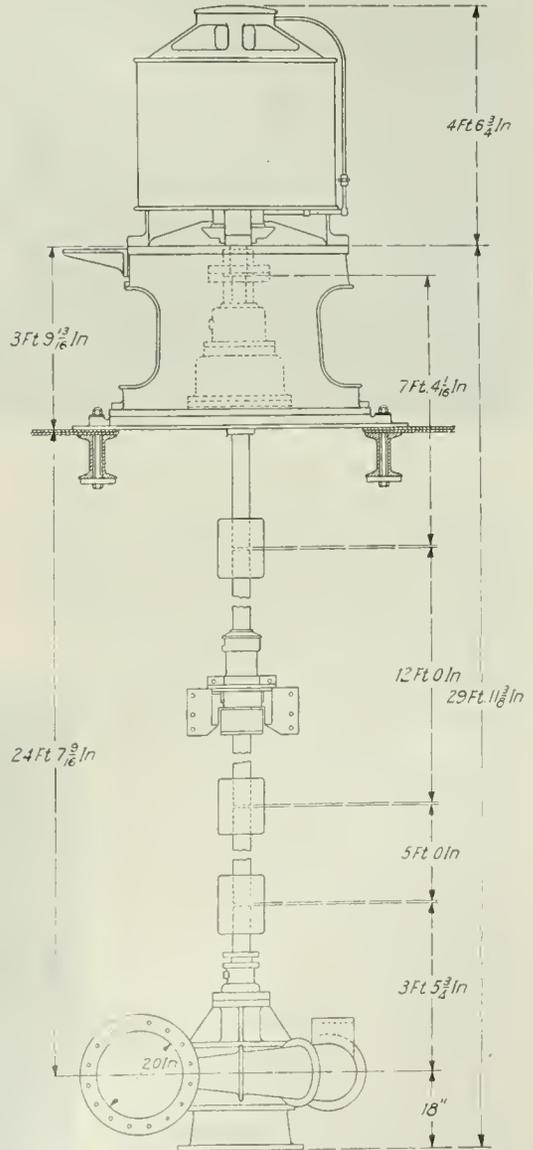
Elevation of the Pump Motor, its Base, Shafting, Bearings and the Pump
